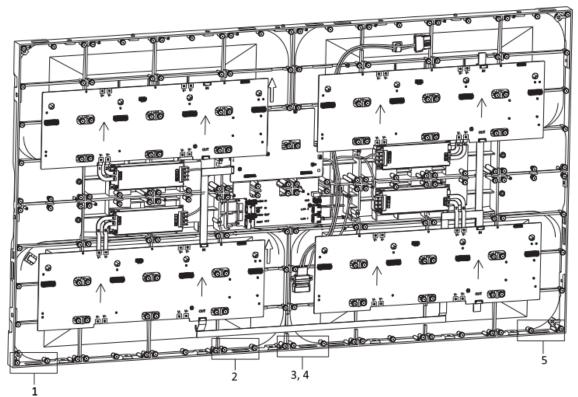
Cabinet Cable Holes Table 3-2 Usage Suggestion for Cable Holes
